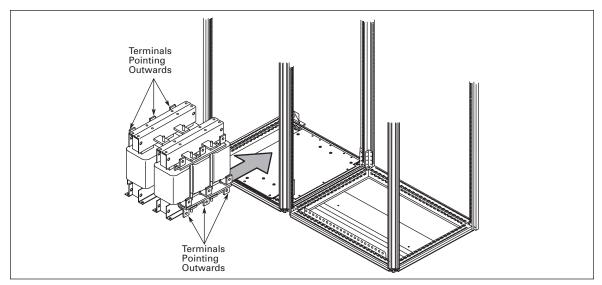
Installing AC Choke (2 Chokes); FR13 and FR14
